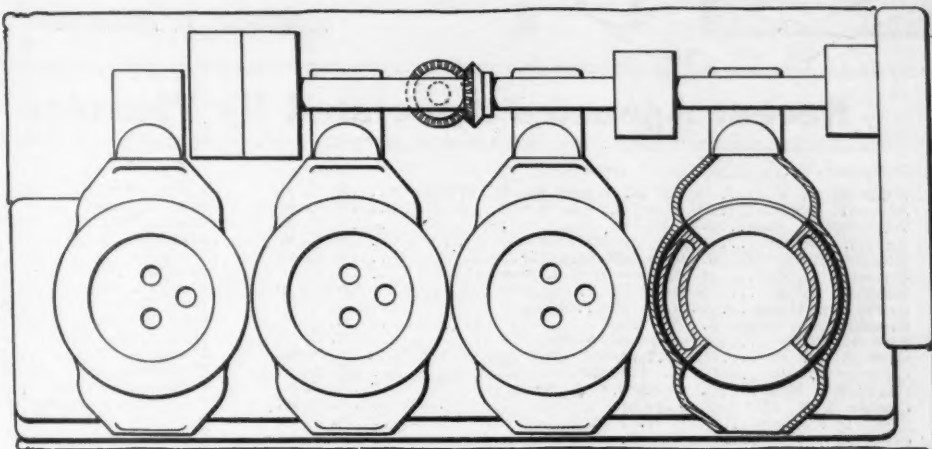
PLAN VIEW OF BAYNE ENGINE
